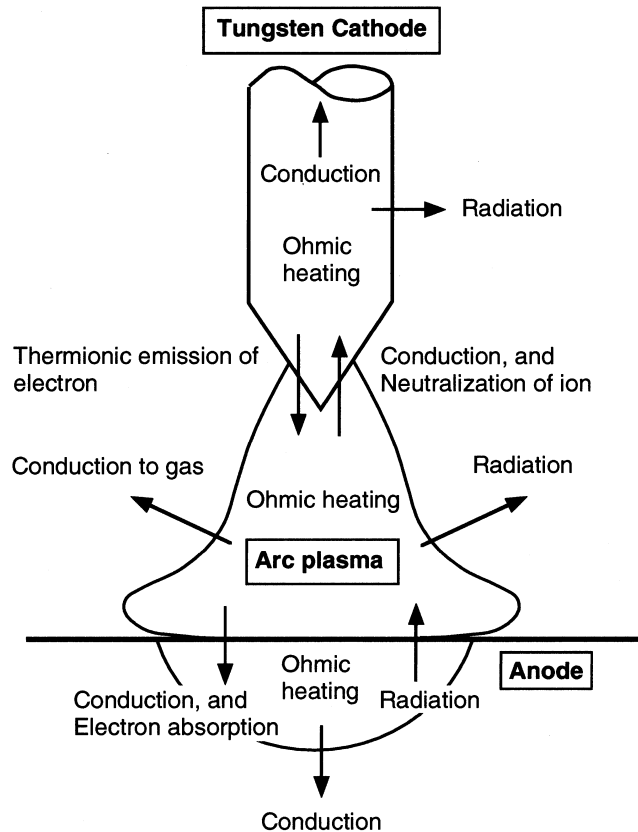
Schematic illustration of energy balance in TIG welding process.
